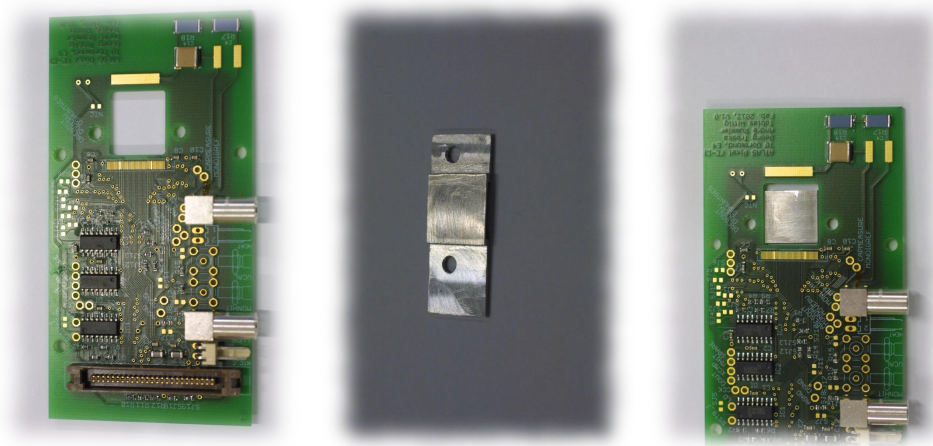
Assembly DO-10 mounted on SCC card demonstrating first HV daughter card version.
